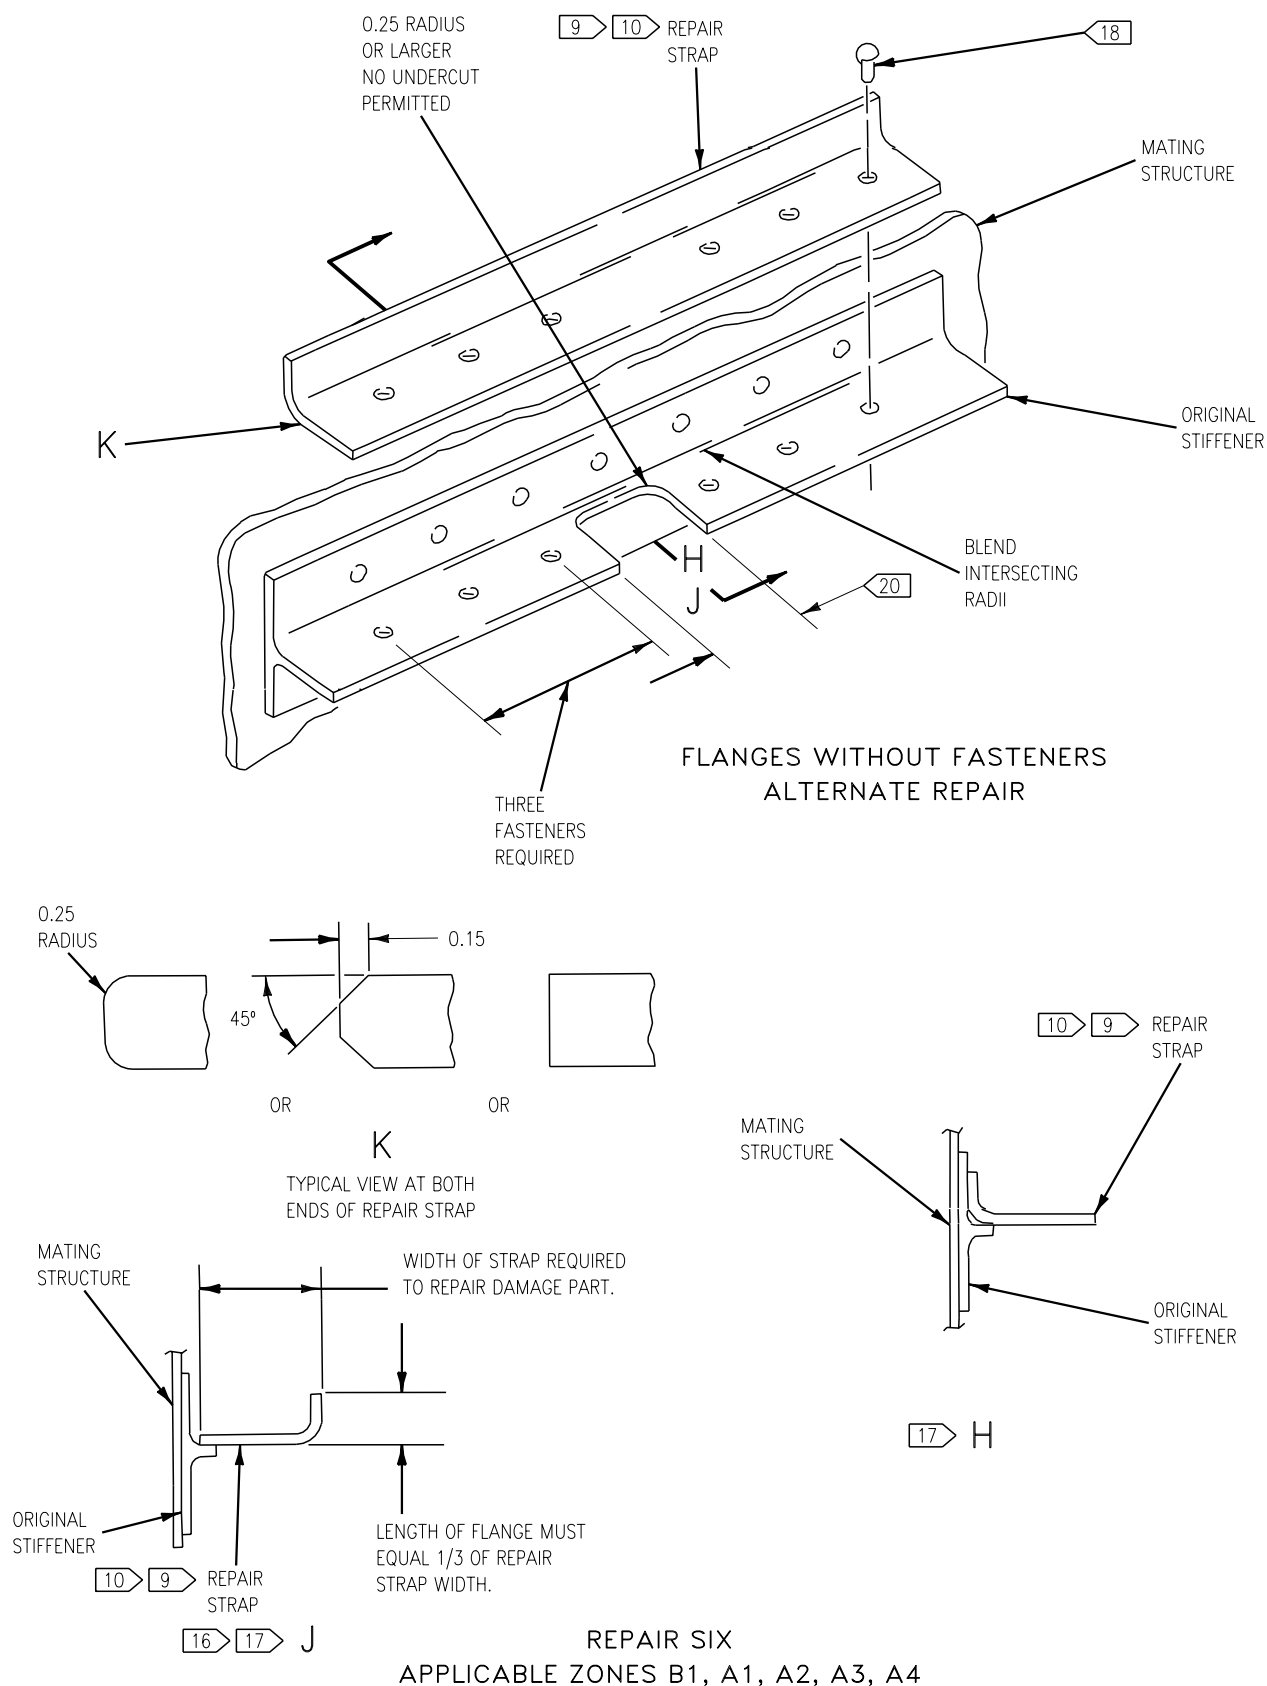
Aluminum and Titanium Sheet, Formed Structure (Sheet 3)
